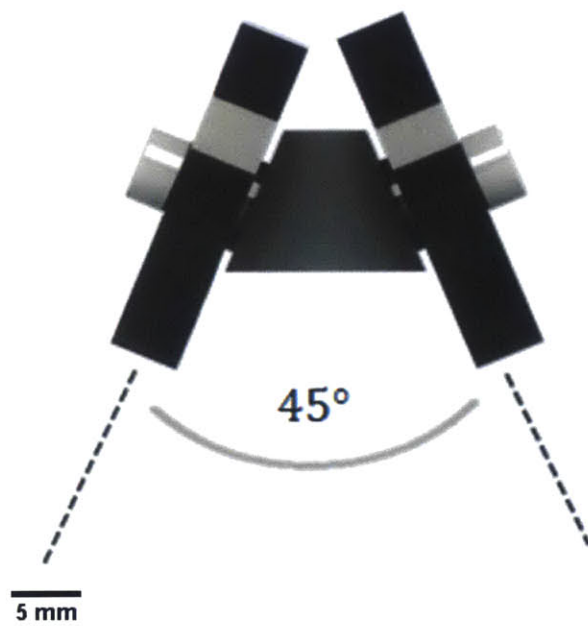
Bottom view of the Angled wheels tensioner. The angle between the two wheels is 45°
